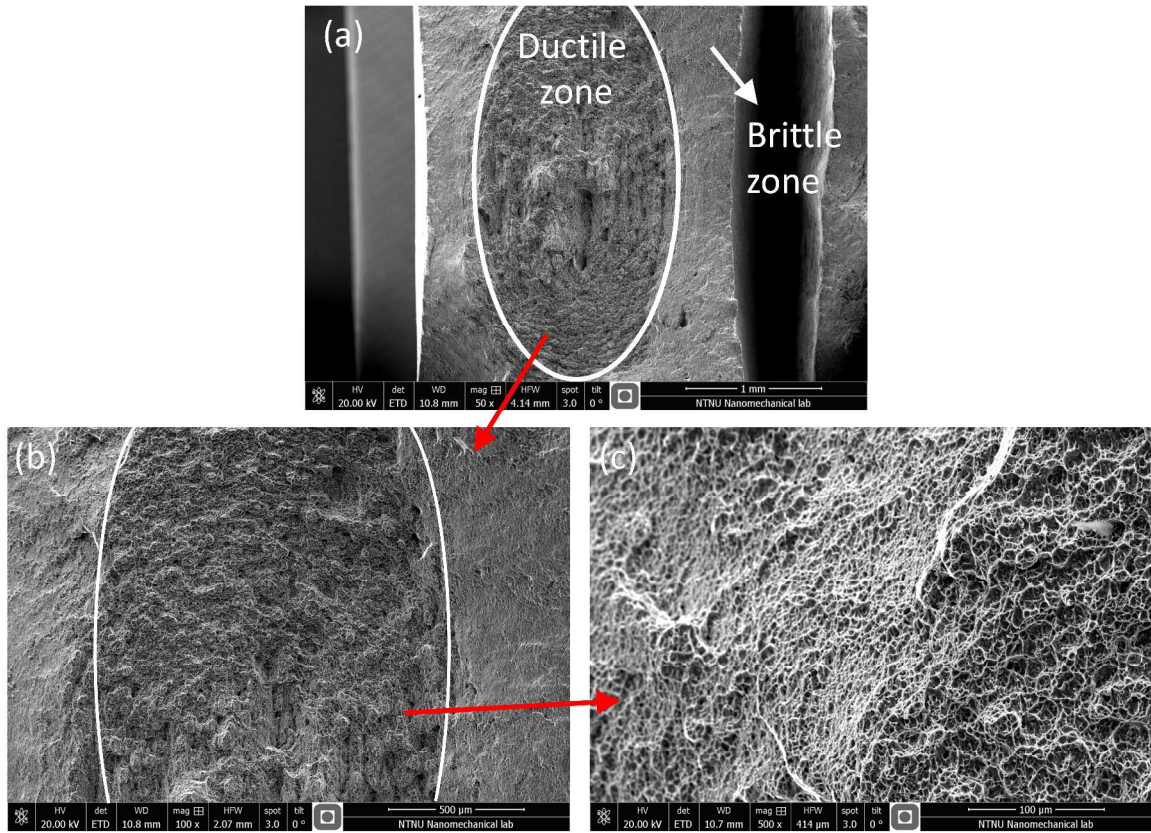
SEM images of fracture surface of the tested wrought samples.
